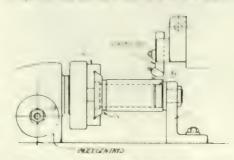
FIG METHOD OF SHAPING THE POT CASTING SQUARE
